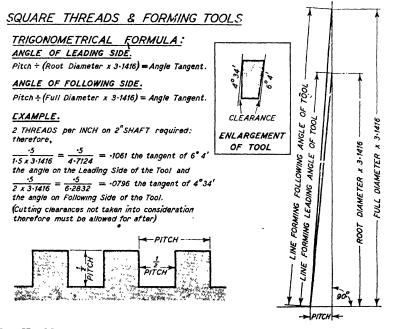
METHODS OF ARRIVING AT TOOL ANGLES FOR CUTTING SQUARE THREADS
